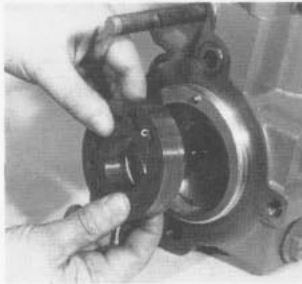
Install Gerotor Assembly (Earlier Units)
